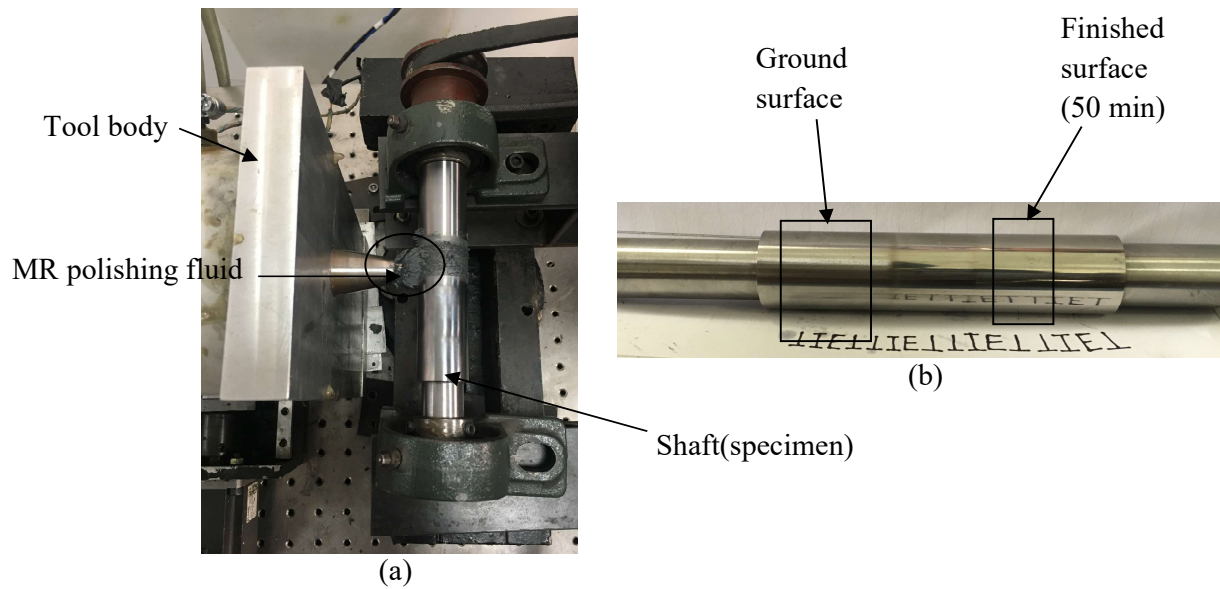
(a) Experimentation on AISI H13 steel cylindrical workpiece surface to be used for time scaling, to perform the experiment on actual extrusion punch AISI H13 steel (b) mirror testing of finished surface
